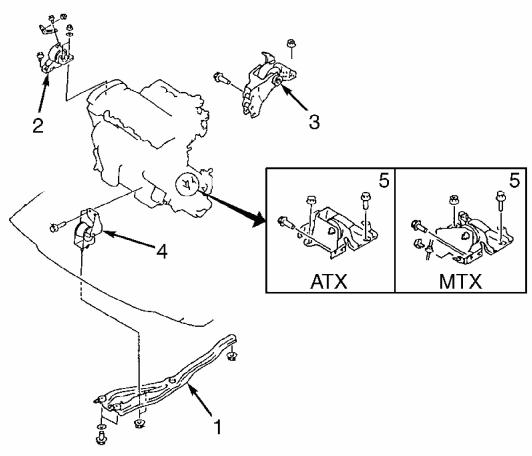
Removing Engine Mounts (Protege) Courtesy of MAZDA MOTORS CORP.
